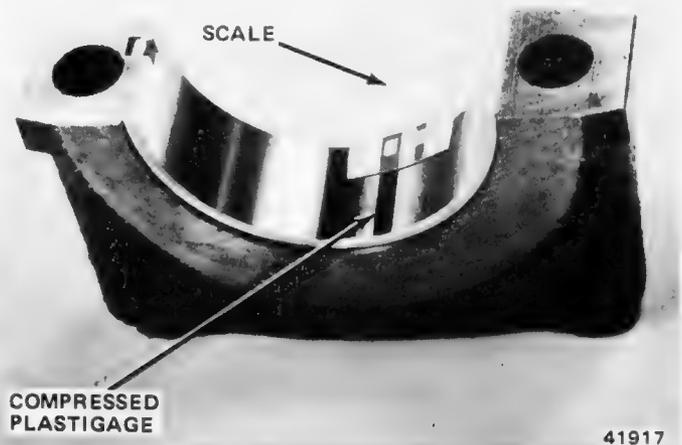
B-62 Checking Main Bearing Clearance with Plastigage
